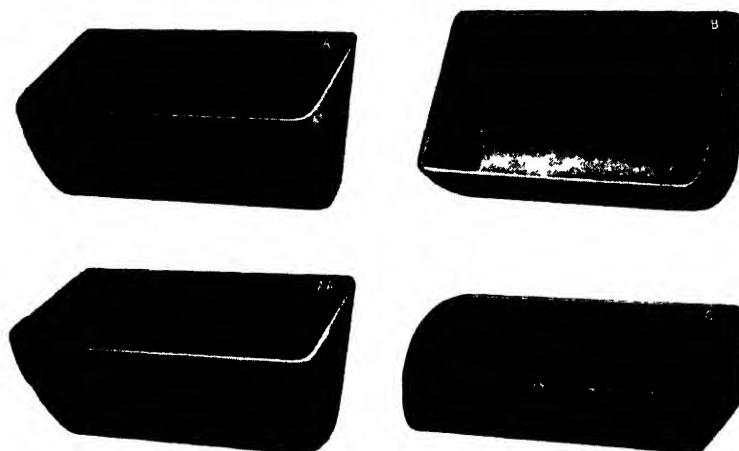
Manufacturers' Standard Malleable Iron Buckets.
